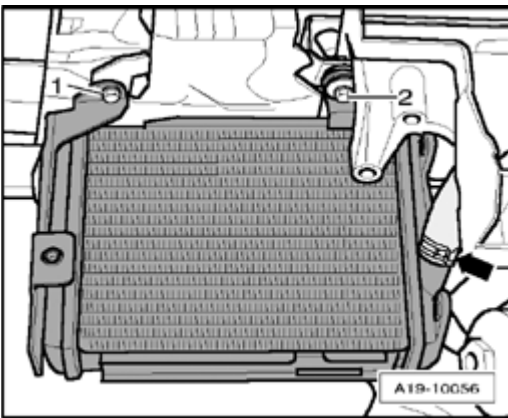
Auxiliary Radiator Coolant Hose & Bolts
